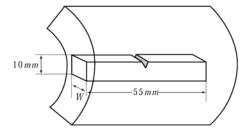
The position of selection for impact test specimen taken from the seamless steel pipes and other portions than weld zone of electric-resistance welded steel pipes
